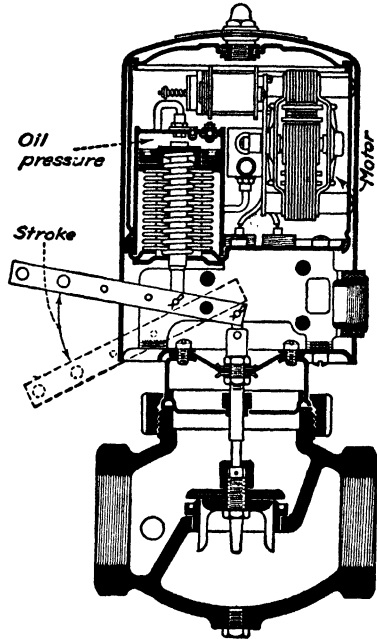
Motor-driven pump supplies oil to operate bellows. (Courtesy of General Controls Co.)
